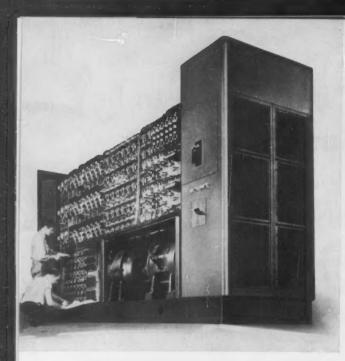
Grouped in this cabinet are the electrical controls for the twenty-four motors which deliver 300 H.P. to a single milling machine.
